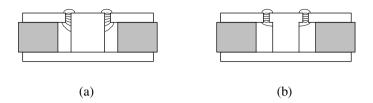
Cross-sections of common magnet assemblies. a) Typical shape of pole pieces in inexpensive ferrite magnet drive units. Magnetic flux in the air gap is not symmetric. b) Better solution, that employs a T-shaped pole piece.
